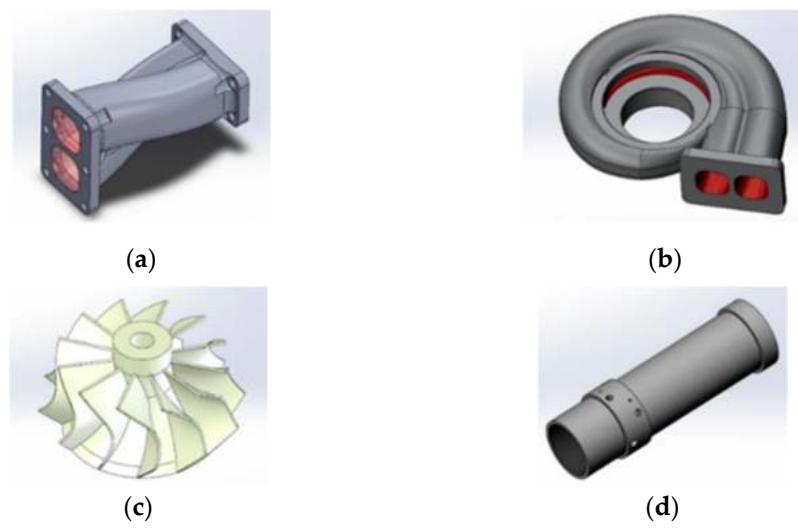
3D CAD model of parts [27]. (a) Conversion inlet; (b) Asymmetric volute with nozzle ring; (c) Rotor A; (d) Exit duct.
